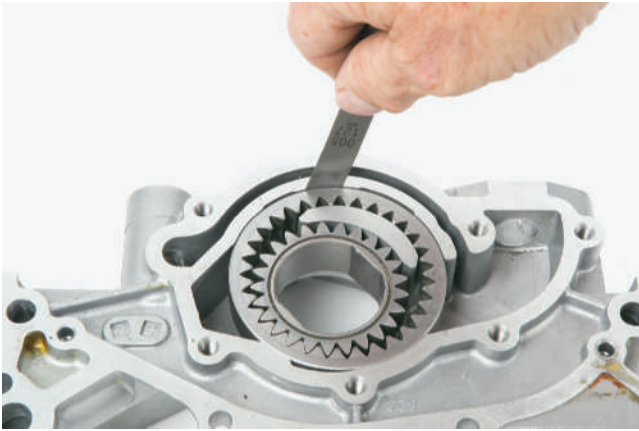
Check the clearance between the outside diameter of the outer gear and the pump body.
